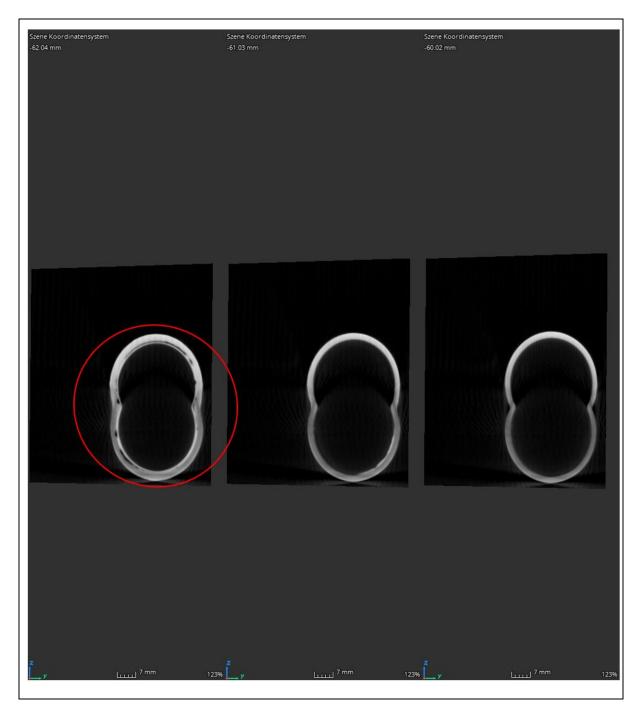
Left weld (No.1) side view picture 4-6
